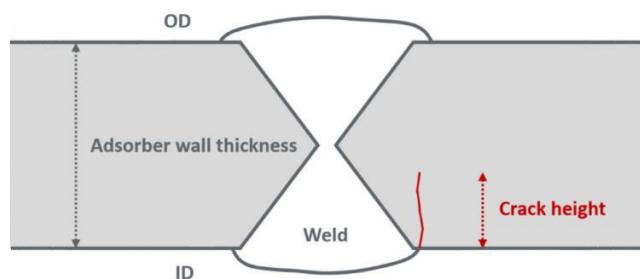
Illustration of typical fatigue crack in butt weld.
